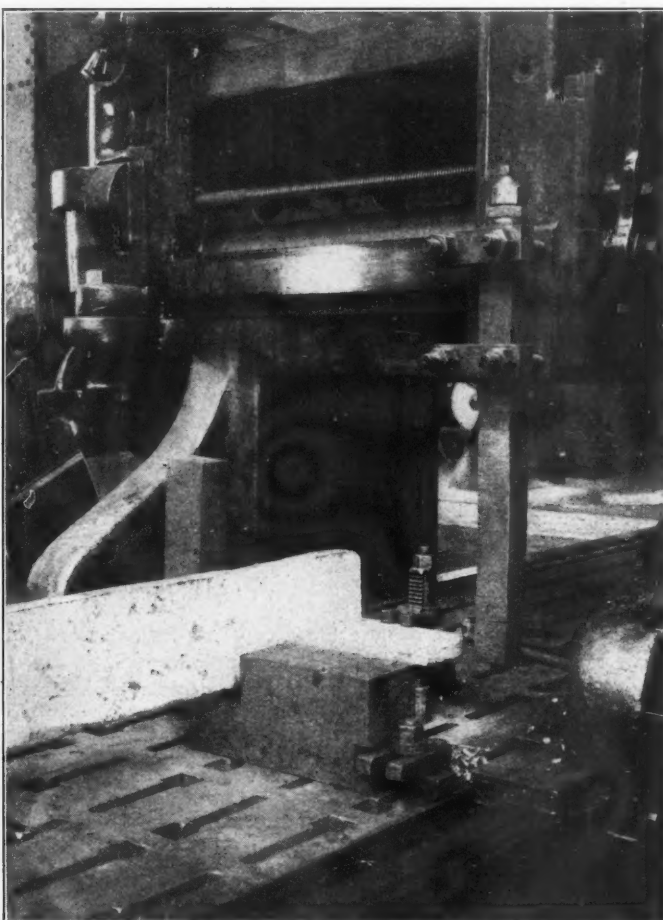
Slotting the End of a Grate Bearer Cross-Tie.
